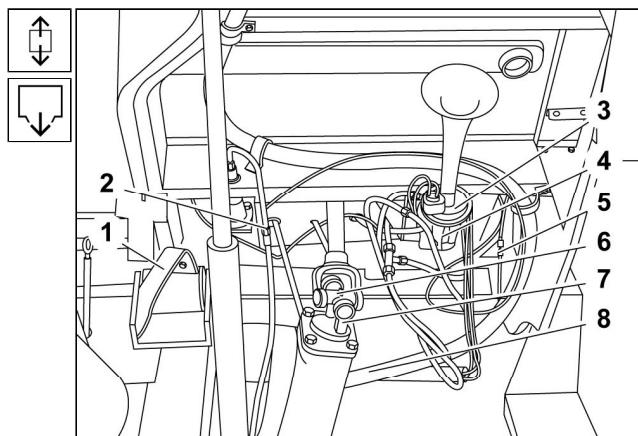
Grounding cable of cabin, crosshead pin, air manifold, Bowden cable - removal
